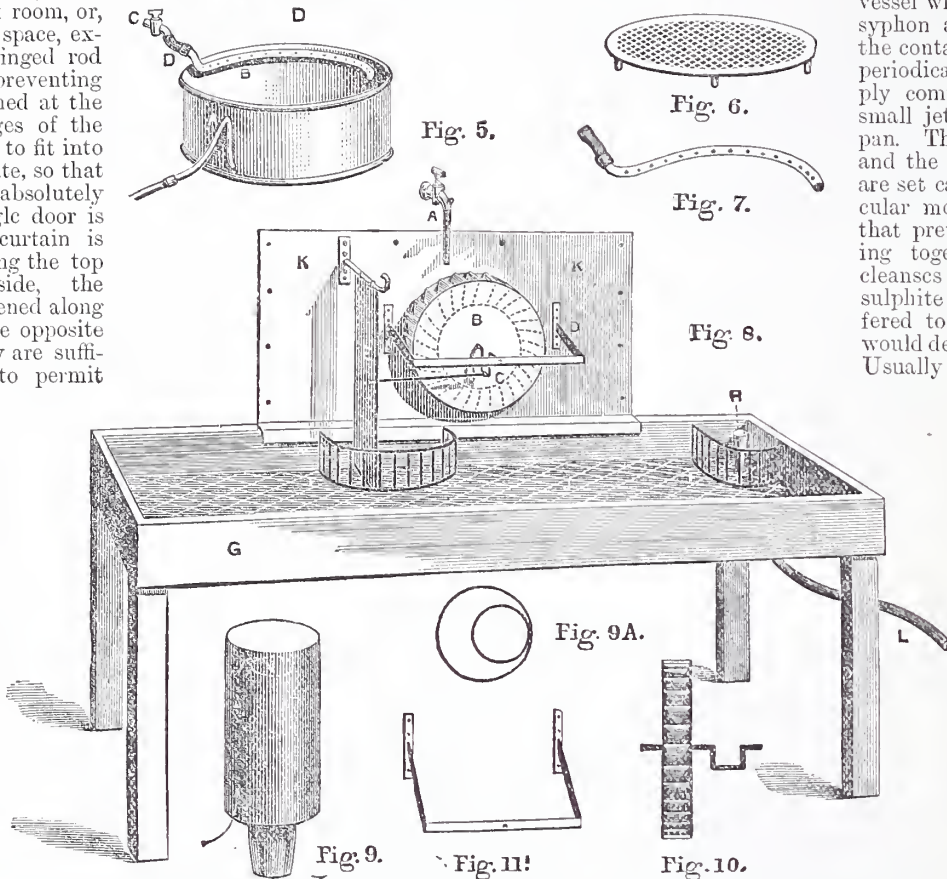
Small Washing Machine—A, Syphon; B, Jet Pipe; C, Water Supply; D, India-rubber Connection. Fig. 6.—False Bottom of Perforated Zinc. Fig. 7.—Brass Perforated Jet Pipe. Fig. 8.—Large Washing Machine—A, Water Supply; B, Water Wheel; C, Crank; D, Support; E, Paddle; F, Cage; G, Tank; H, Water Plug; J, False Bottom of Perforated Zinc; K, Zinc Sheet to protect Wall from Water; L, Wash Pipe. Fig. 9.—Waste Plug. Fig. 9 A.—Diagram showing how Plugs are Soldered together. Fig. 10.—Water Wheel and Crank. Fig. 11.—Iron Frame to support Axle of Wheel.
